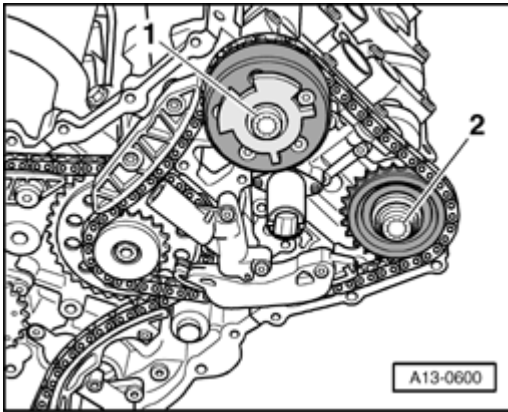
Removing/Installing Bolts For Camshaft Chain Sprocket Or Camshaft Adjuster Using Multipoint Socket T10035
